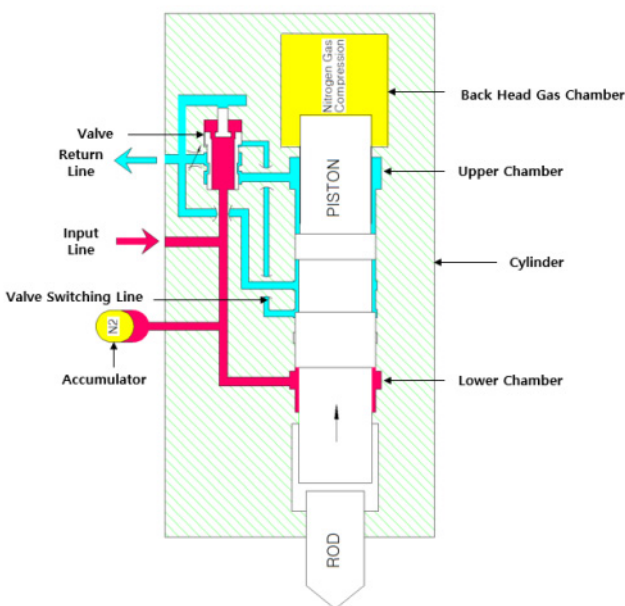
Schematic cut view of a hydraulic and pneumatic breaker
